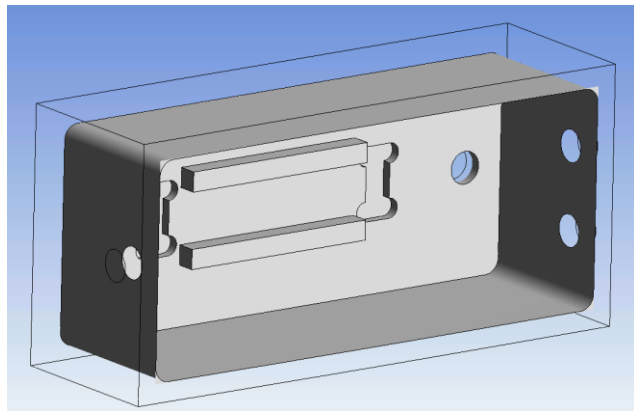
Clipped surfaces used in post processing for the large enclosure half.
